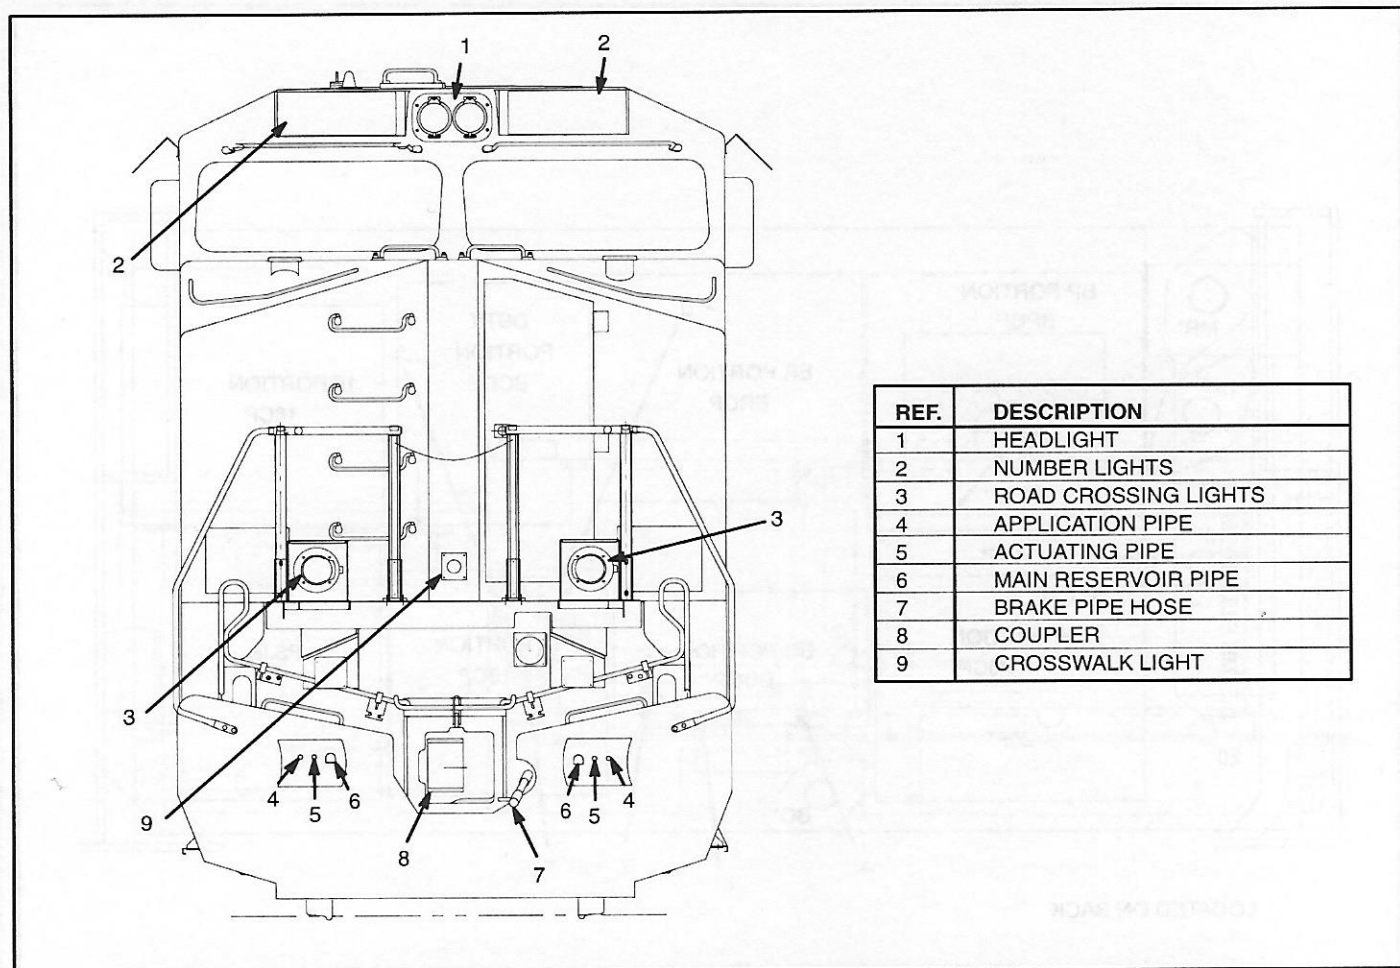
LOCOMOTIVE SHORT-HOOD ASSEMBLY AND END CONNECTIONS. E-42401.
